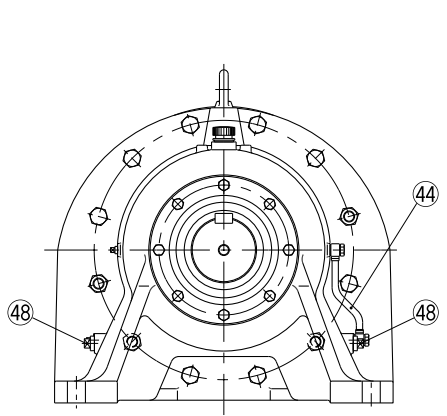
Type CHHM (Horizontal, Gearmotor), Single Reduction (Example: Frame size 6225)
